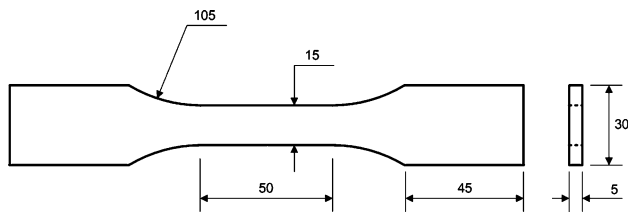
Geometry of the fatigue specimen (dimension in mm)
